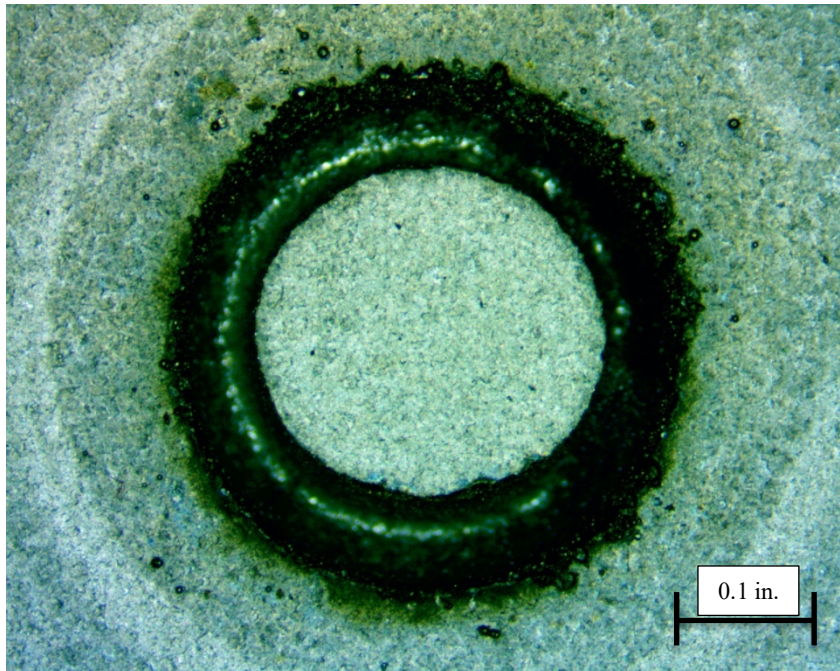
Task 1.2 Cut 3 with a Cut Depth of 0.1 in., an Electrode Diameter of 0.33 in., and a Fastener Material of Inconel
